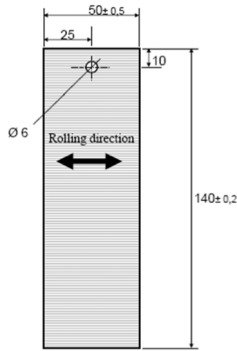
Schematic of the sheet. All dimensions in mm.
